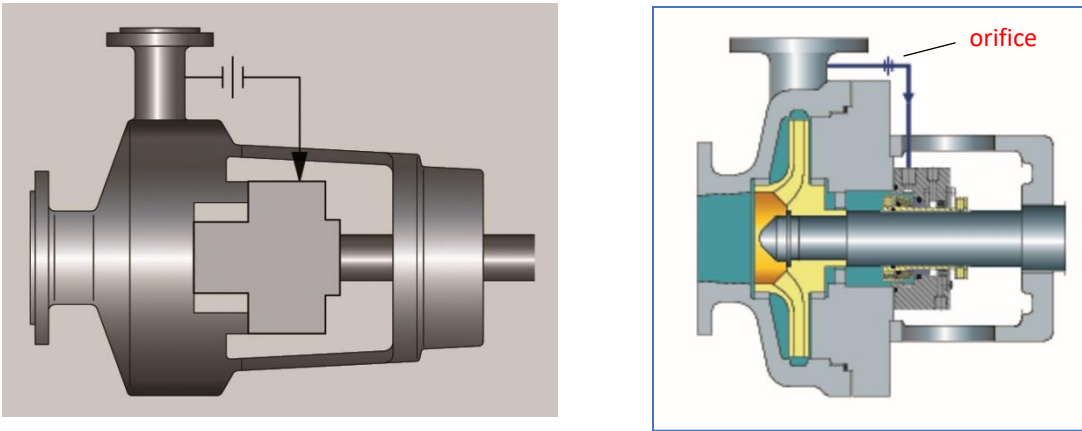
API-Piping-Plan 11 (schematic view and cross-sectional drawing)
